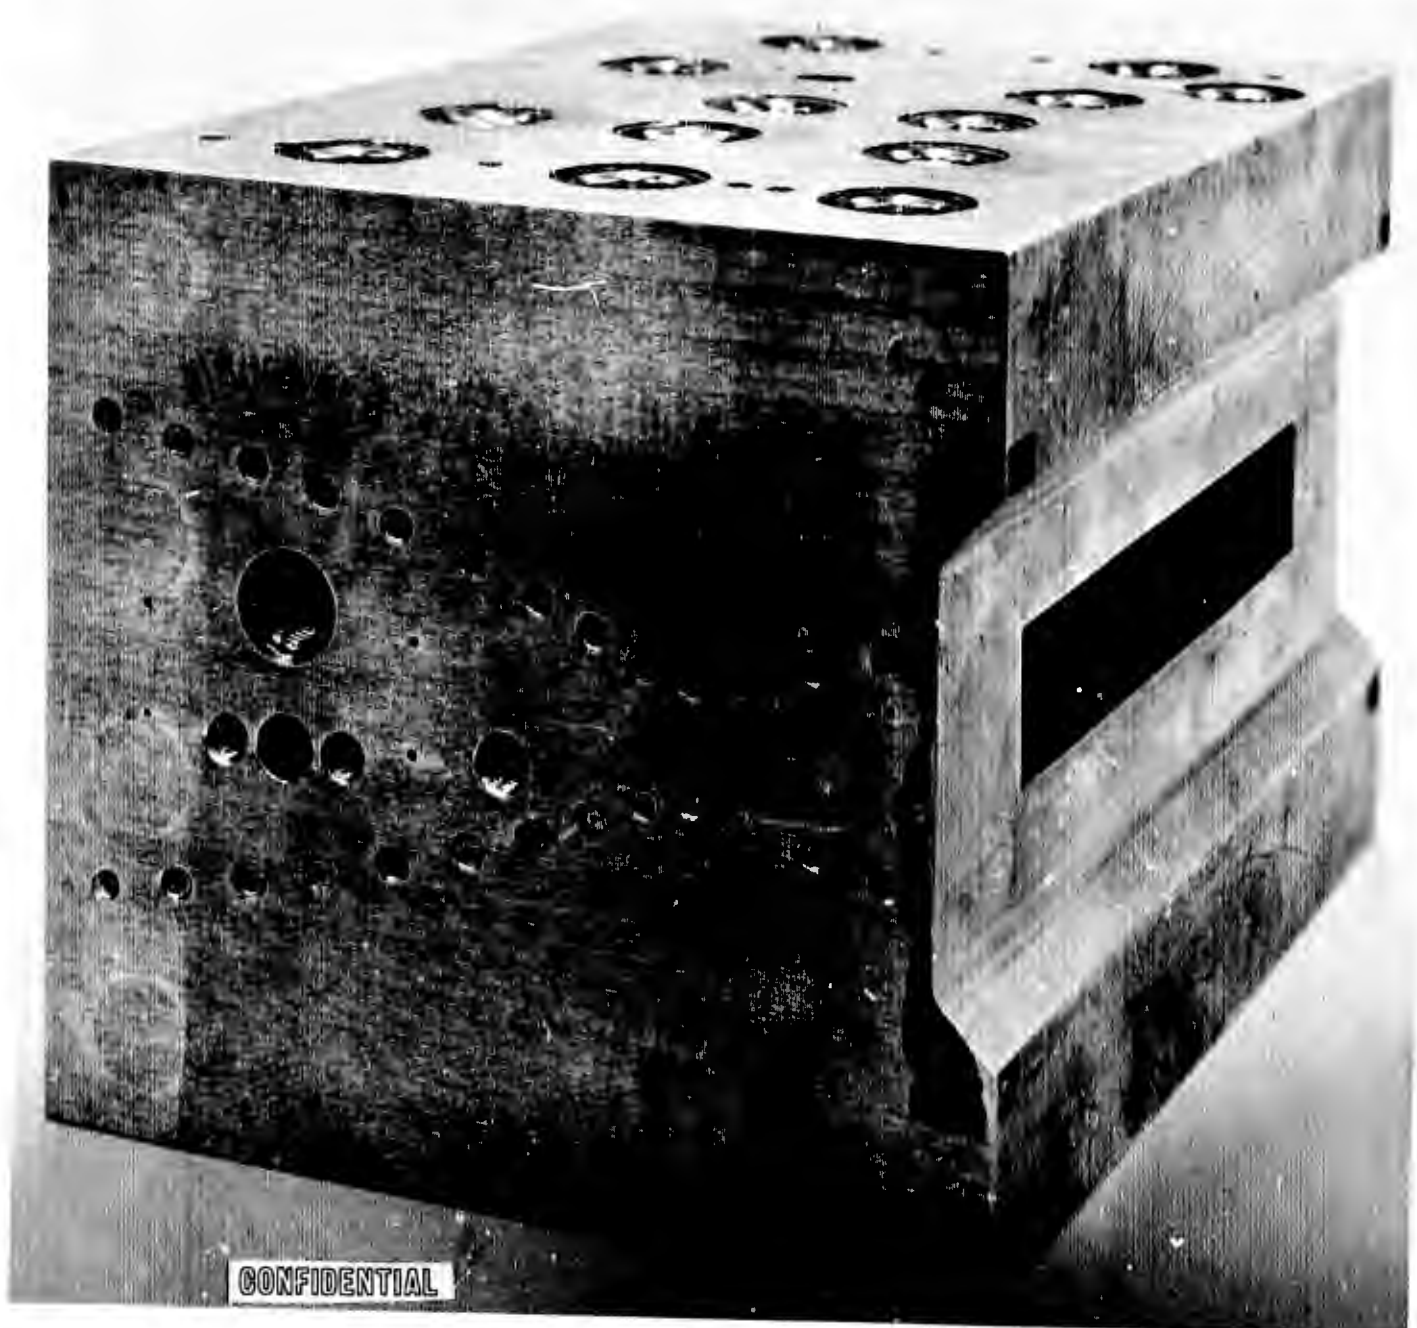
Exploded View of 5-Inch Solid Wall Segment With Chamber Support Housing (U)
